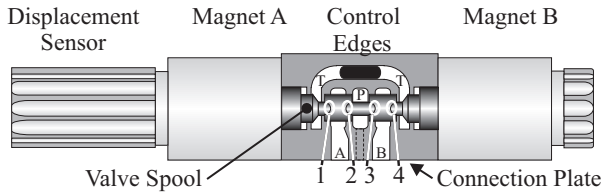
Schematic view of a direct-driven proportional acting valve and control edge numbering
